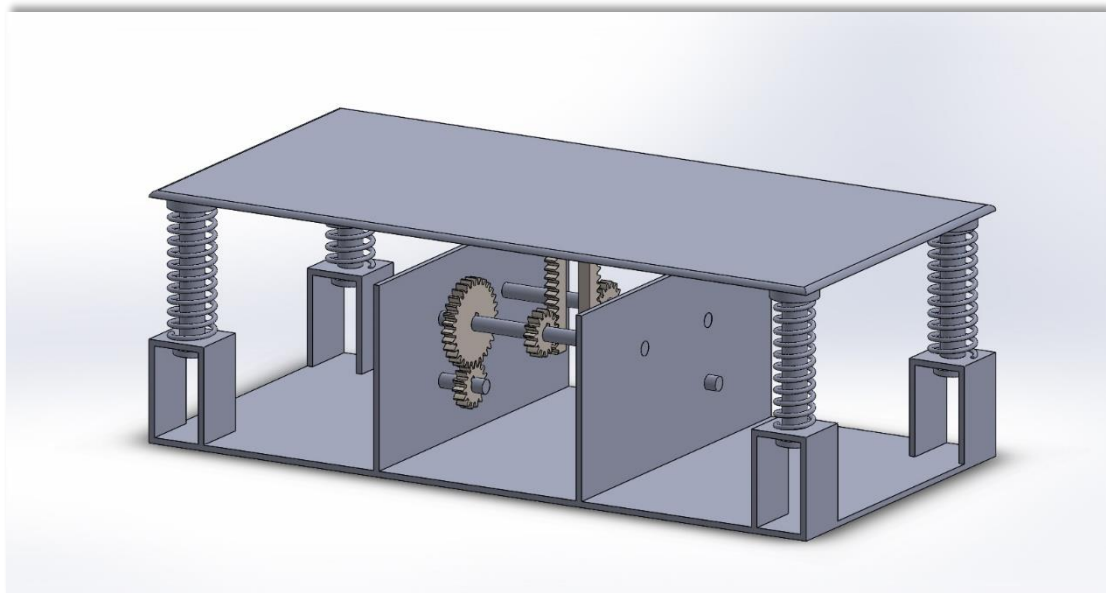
Assembled View Mechanical Footstep Power Generator
